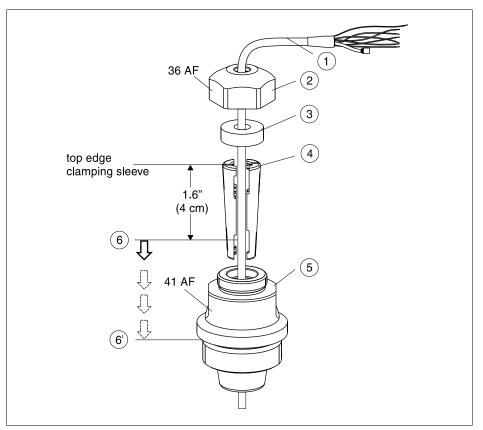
Installing the Waterpilot FMX 167 with cable mounting screw, depicted here with G 1 1/2 thread
